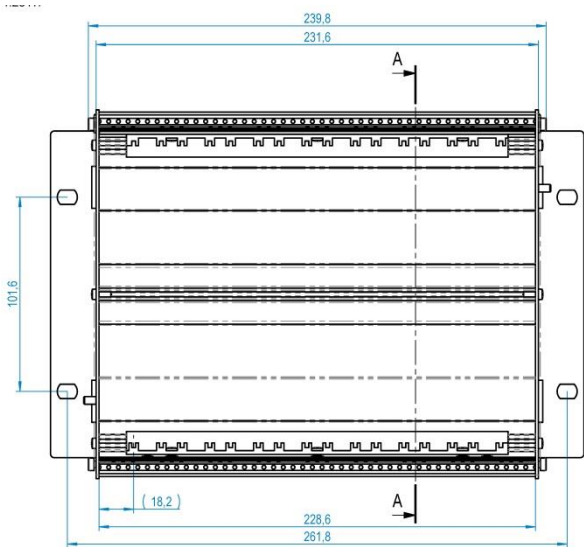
Mounting dimensions BCU-50-M-W for wall mounting
